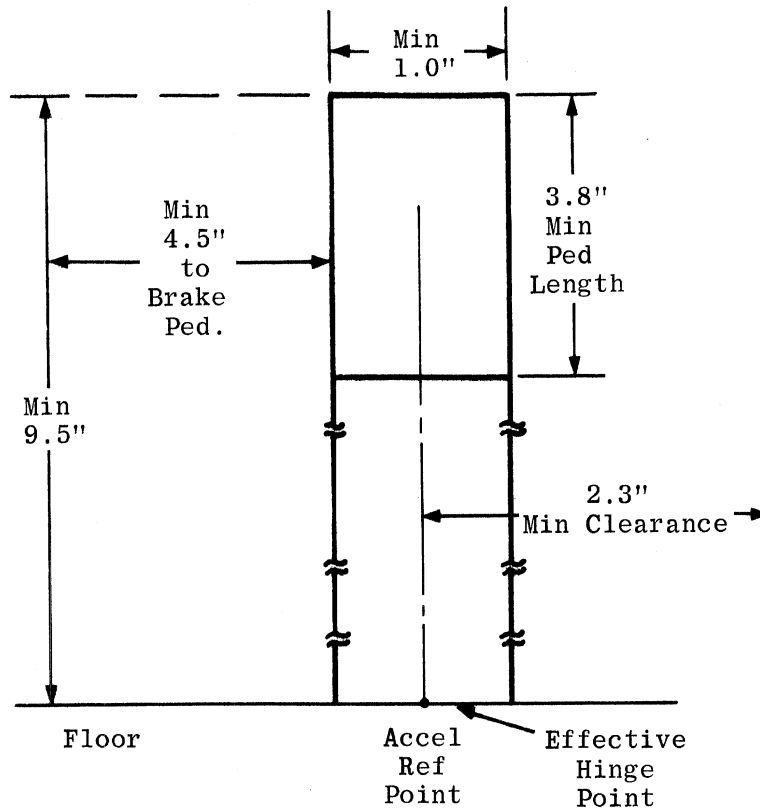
RECOMMENDED ACCELERATOR PEDAL DIMENSIONS AND CLEARANCES
